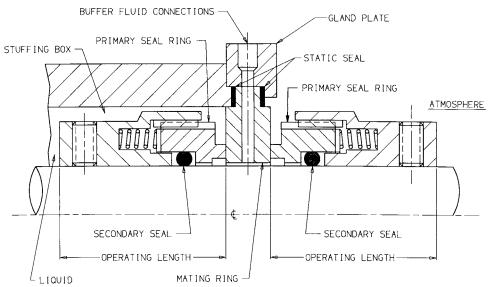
Double Seals—Face to Face Classification Type C Grade 1
